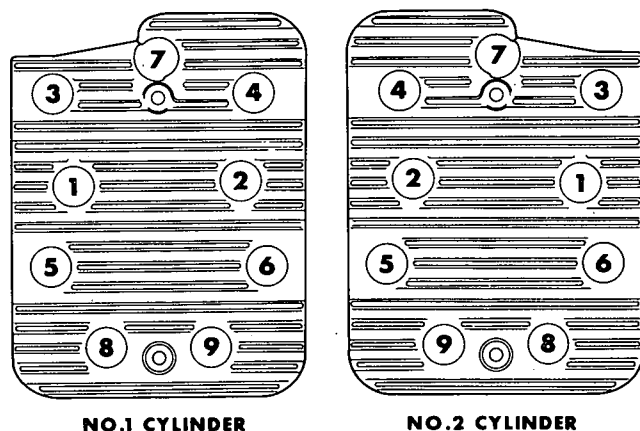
CYLINDER HEAD TORQUE SEQUENCE
